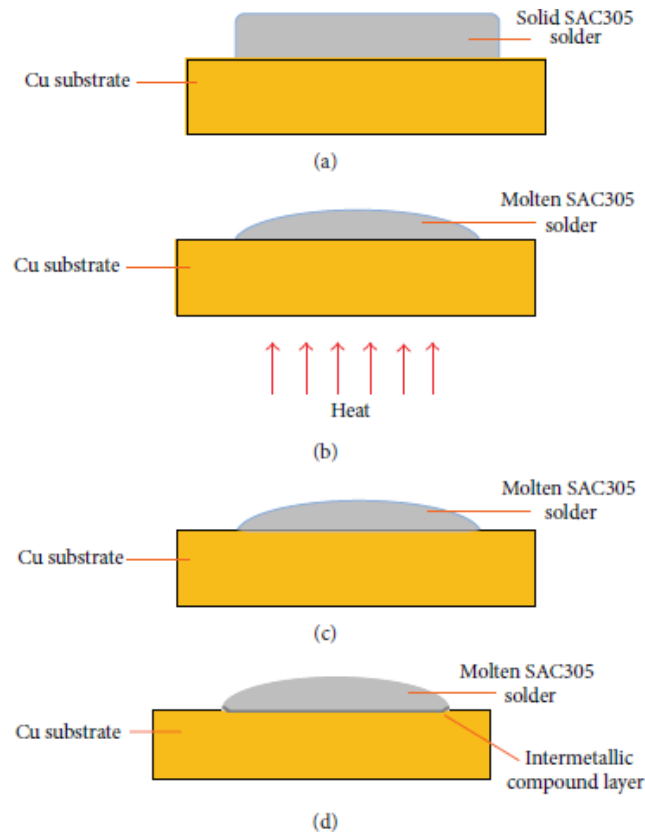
Solder wetting process: (a) SAC305 solder on the Cu substrate, (b) liquid solder spreading over the Cu substrate during soldering, (c) Cu diffuse in the liquid solder, and (d) Cu reacting with the liquid solder to form an intermetallic compound layer.
